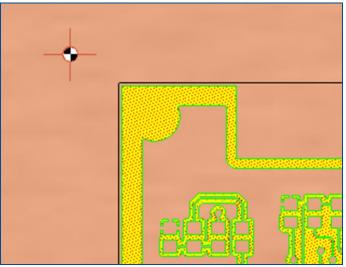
Matching laser head and fiducial position in the *Processing* view
